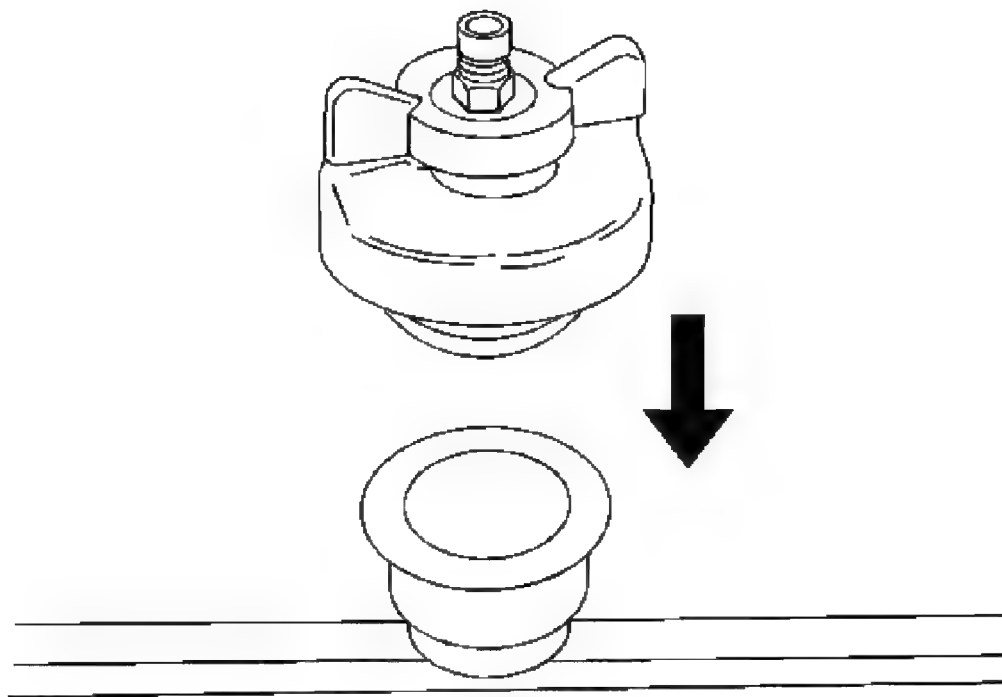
Attaching Van-N-Fill Cap To Vehicles Coolant Fill Port
